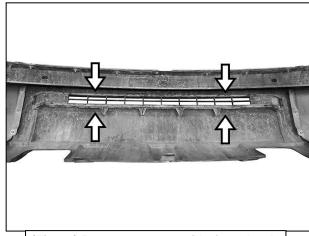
Remove impact bumper and brackets from back of factory bumper
